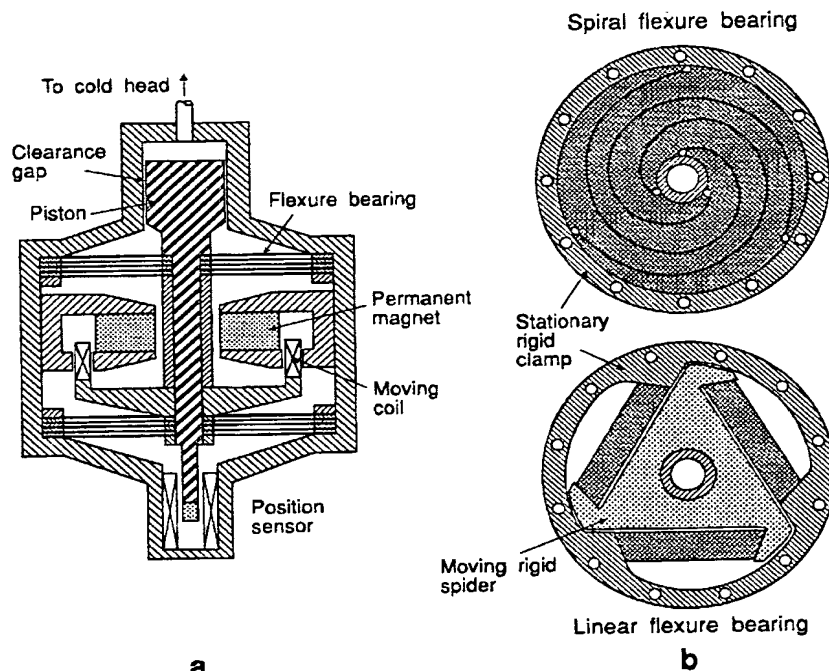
(a) Cross-section of the Oxford-style linear compressor showing the use of flexure bearings. (b) Two types of flexure bearings.
